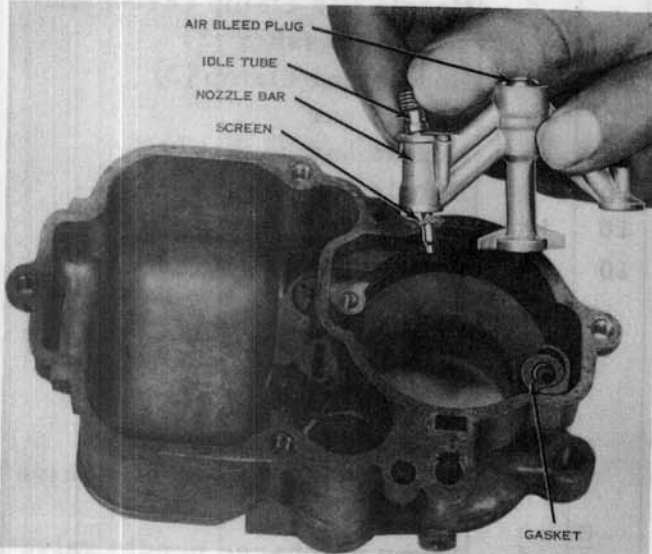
REMOVE NOZZLE BAR ASS'Y
